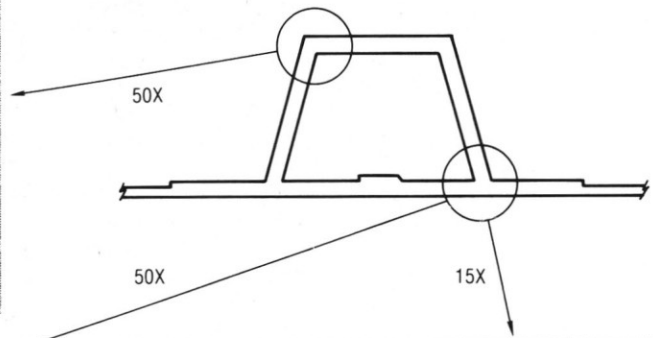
Specimen sectioned from 18-foot, full-scale hat/skin part.
